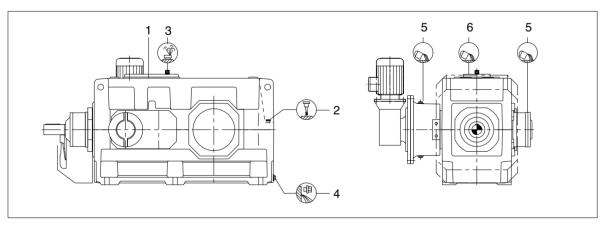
Oil inlet / oil drain on gear units type B3.. ≥ 13 with auxiliary drive
